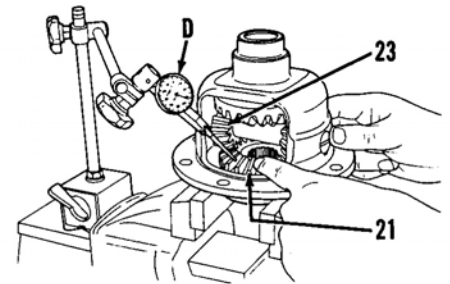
View showing procedure for checking backlash between side gear (21) and spider gear (23) using dial indicator (D). Refer to text.
